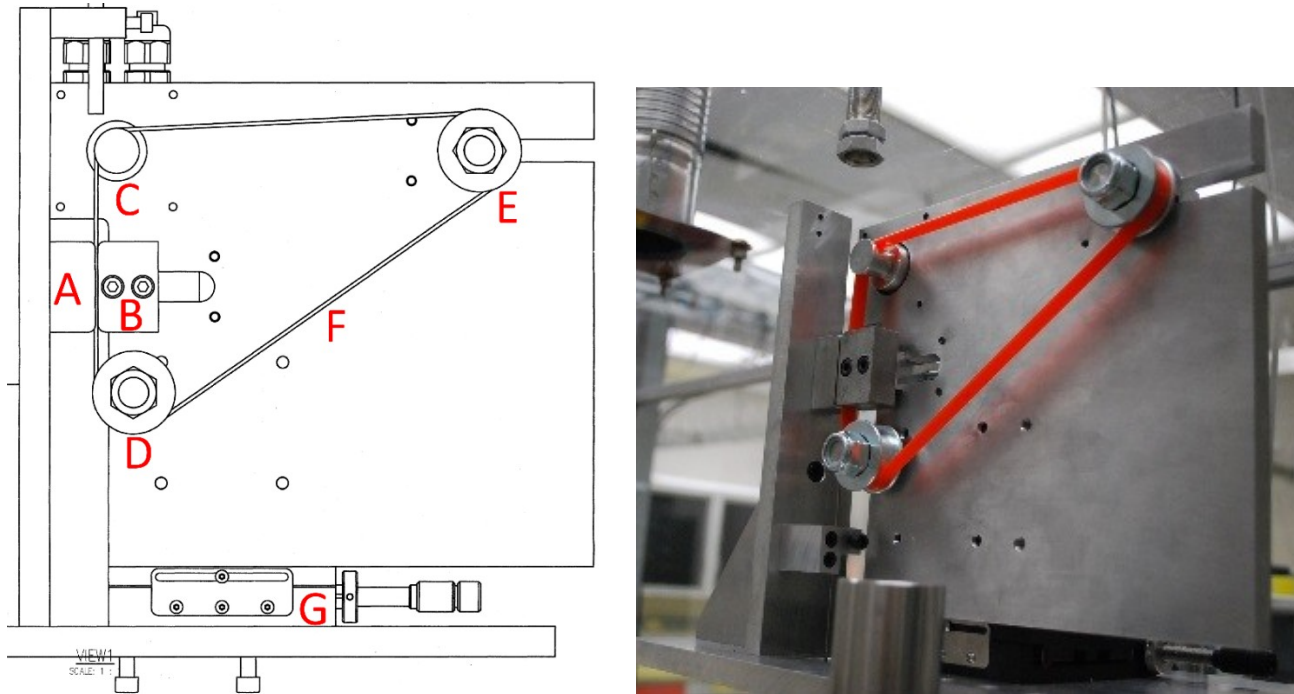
Schematic (left) and Photo (right) of the fiber pulling mechanism. A: V-groove block, B: Belt-backing block, C: Motor drive pulley, D: Fixed free-wheeling pulley, E: Tensioning pulley, F: Urethane belt, G: Belt system translator stage
